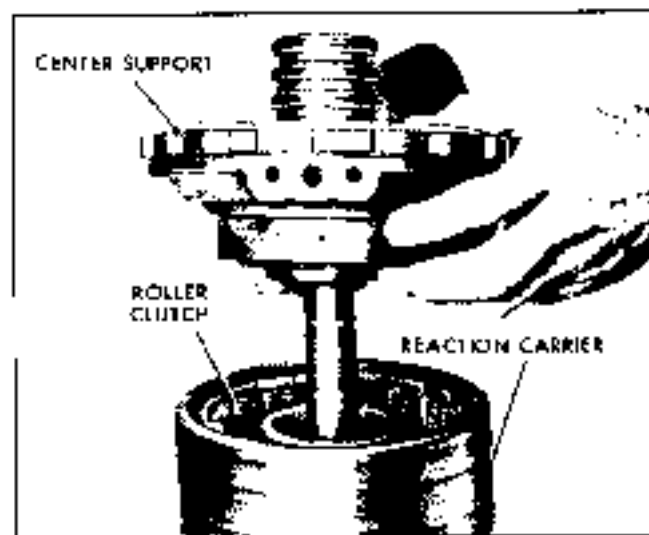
E-136 Installing Center Support into Reaction Carrier and Roller Clutch
